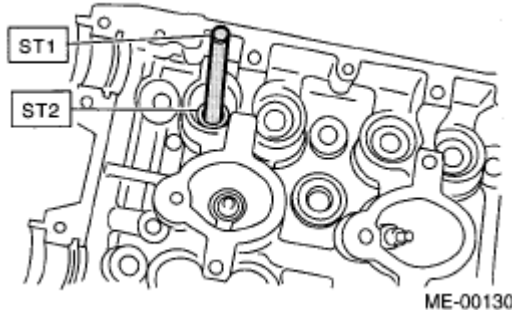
Identifying ST 18251Aa040 Valve Guide Adjuster
